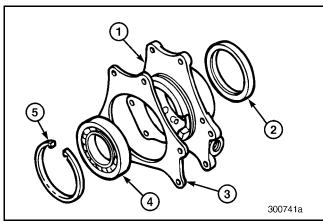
Exploded View of Rear Mainshaft Bearing Cover
